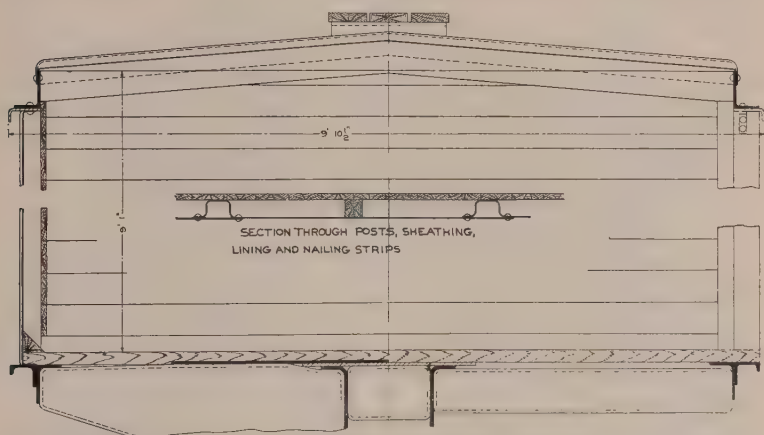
Cross Section of All-Steel Box Car with Wooden Floor and Lining.
